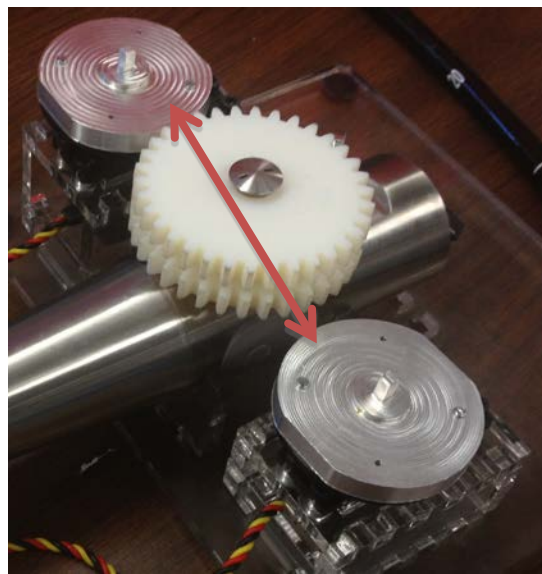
Image showing two of the adapters mounted on the prototype assembly.
